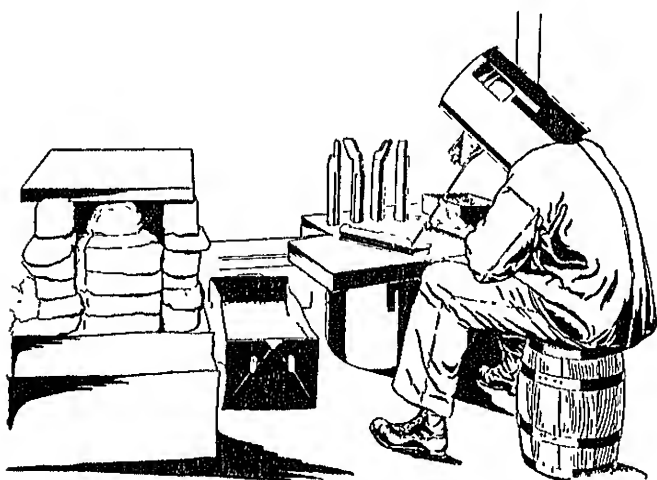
Welding High-Speed Tips Onto Mild Steel Shanks.
